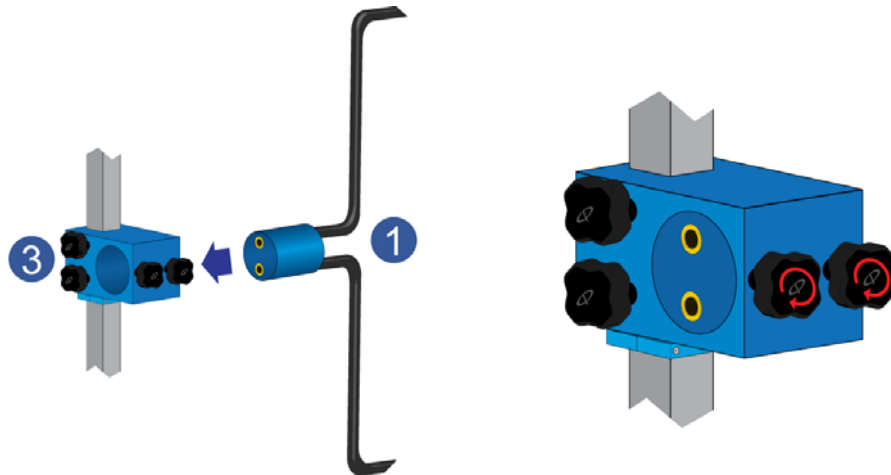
Assembly Instructions – Coil Mounting Structure – Step #4
